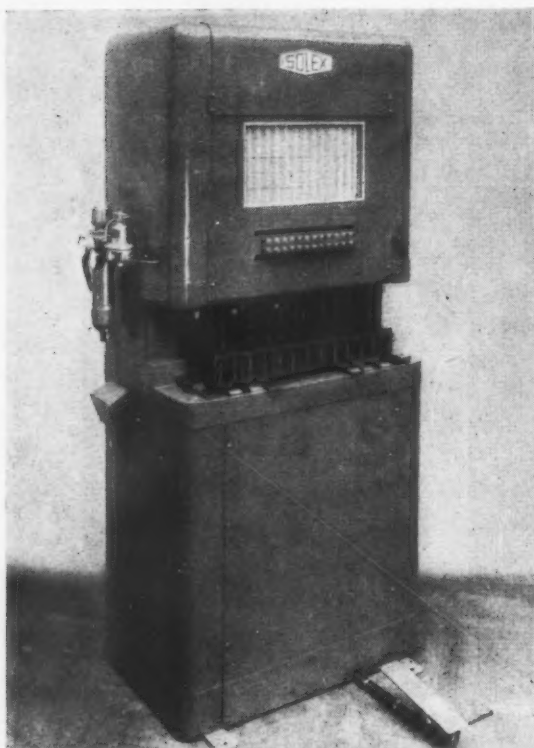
Line inspection — 24-column gauge for checking diameter of valve guides (two measurements taken in each diameter) four or six cylinder, as required. Gauges are actuated into component by an air switch. Retraction is by foot-pedal (air cylinder) and ovality is determined by rotation of gauge, when required.
